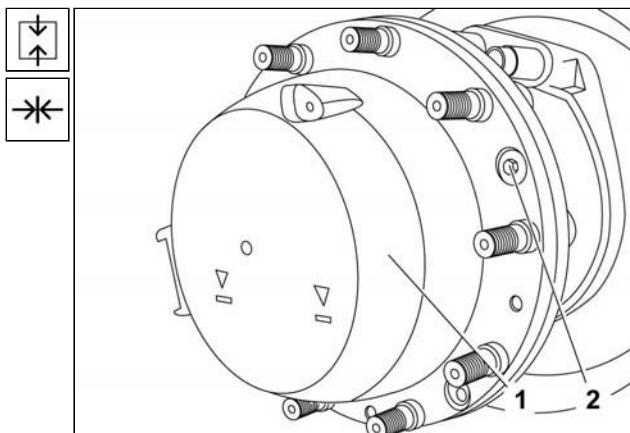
Wheel reduction gear cover of the rear axle - installation
